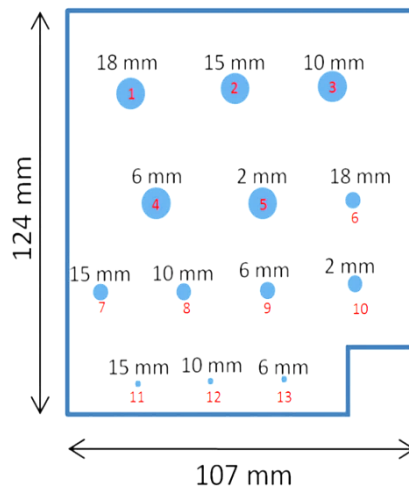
Schematic sketch of the bottom holes on UP/PET liner
